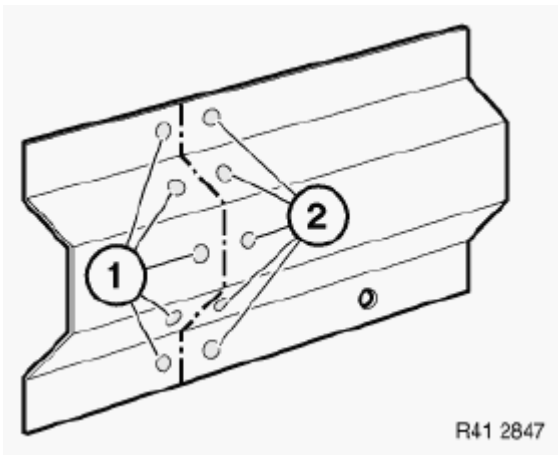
Welding In Reinforcement Plate - Drill Holes
